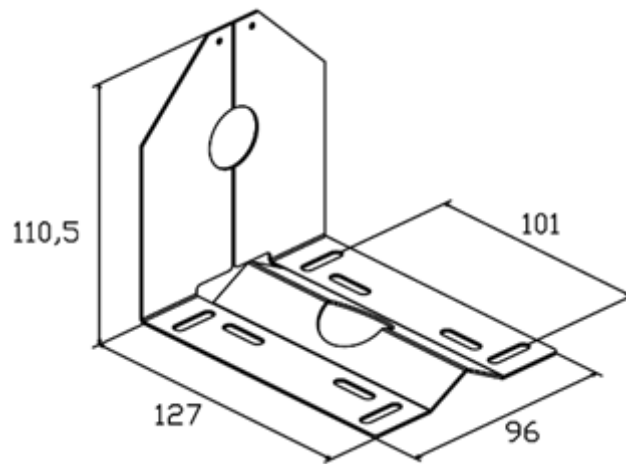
Stainless steel antenna mounting apparatus dimensions in mm
